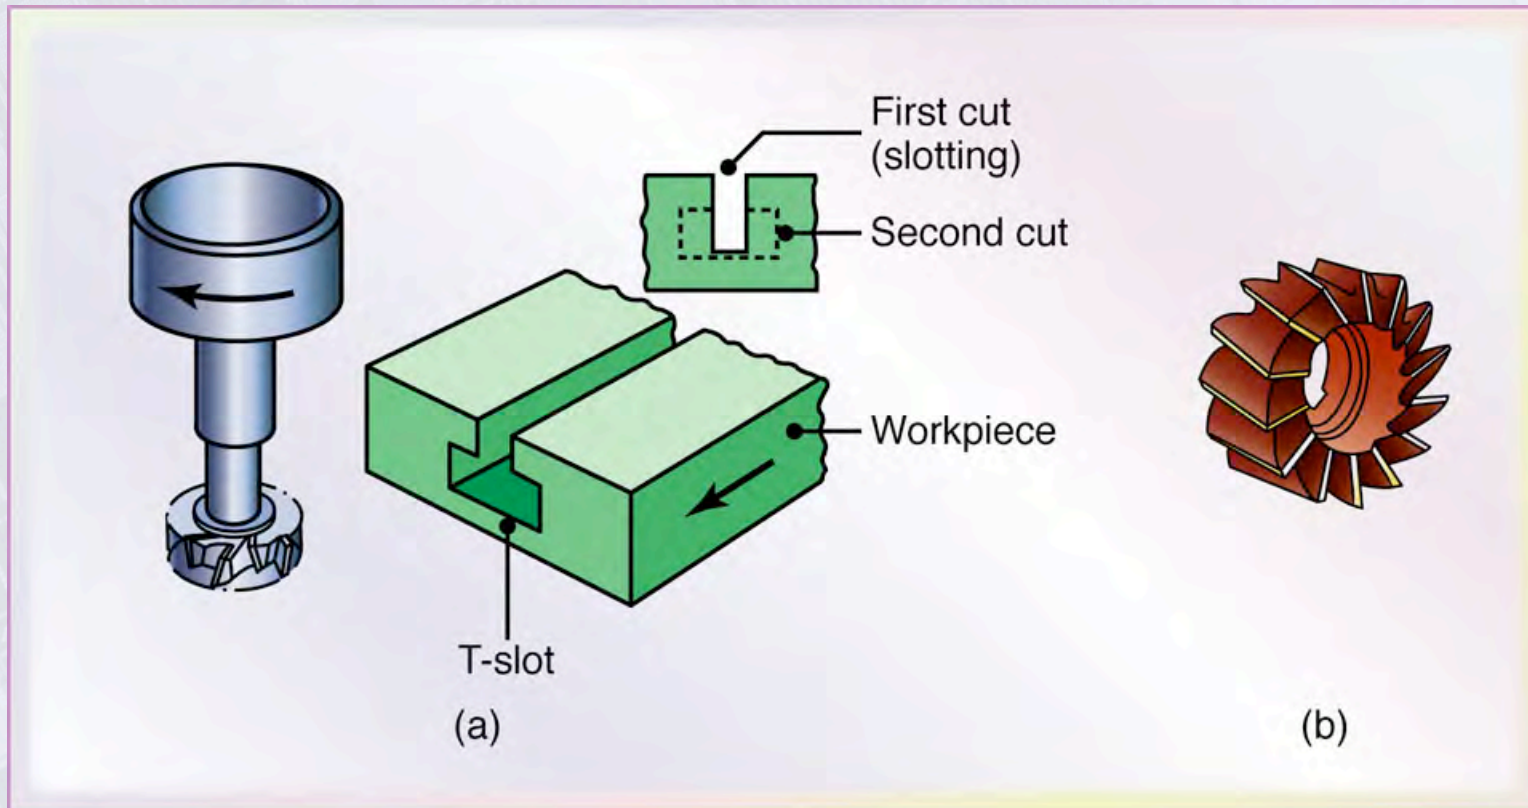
(a) T-slot cutting with a milling cutter. (b) A shell mill.
